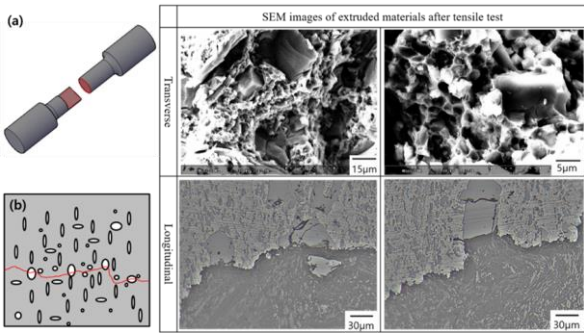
Schematic of (a) observed surface after tensile test and (b) path of crack propagation and SEM and OM fracture surface of tensile tested specimens for Al-17Si-3Fe alloys
